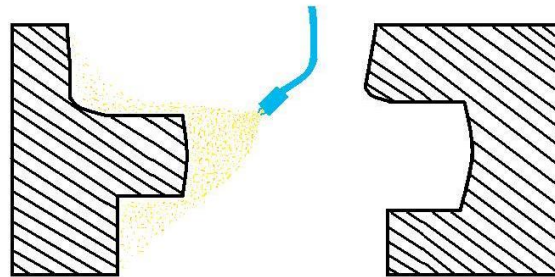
Basic permanent mold being sprayed with refractory slurry prior to the casting operation
